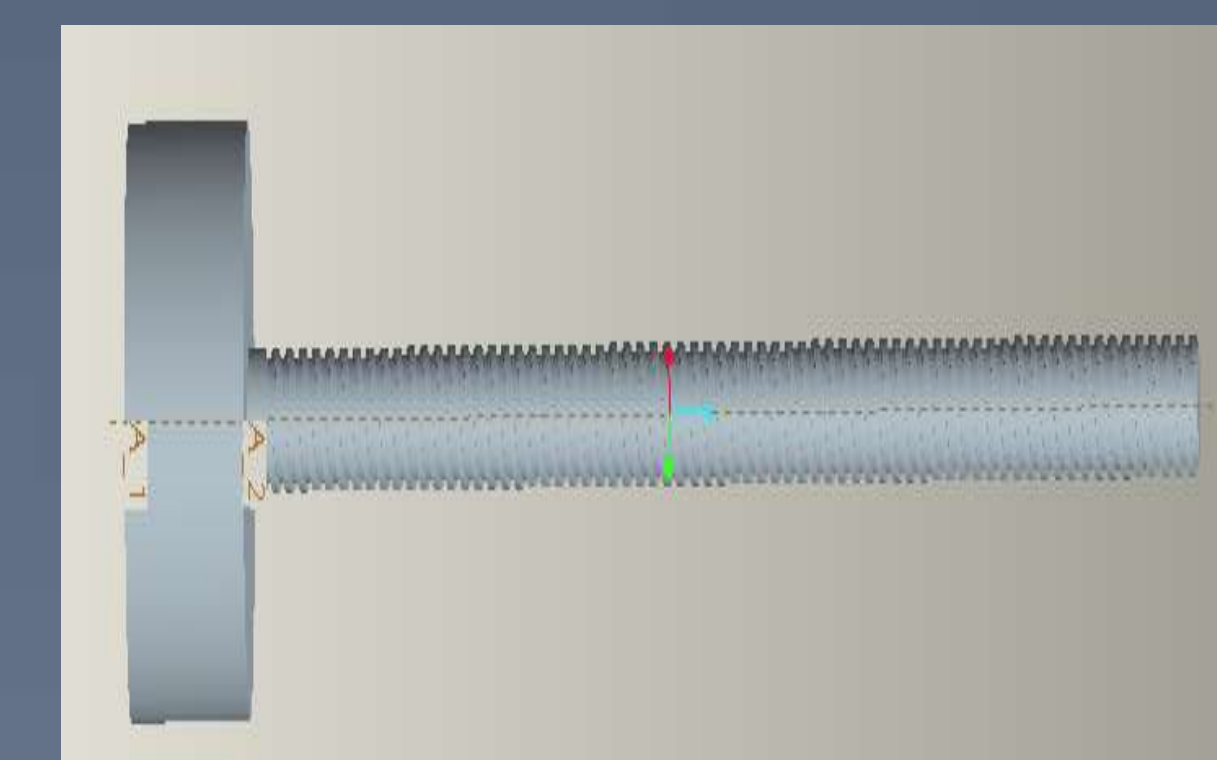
SolidWorks model of insertion tool used to insert current coil into ETT
